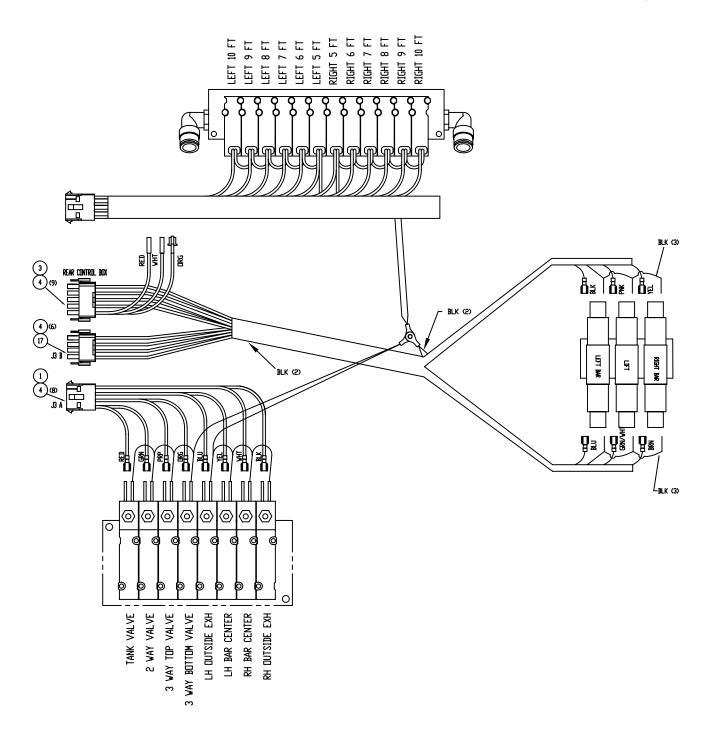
WIRE HARNESS, VALVE BOX (SHEET 1 OF 2)
